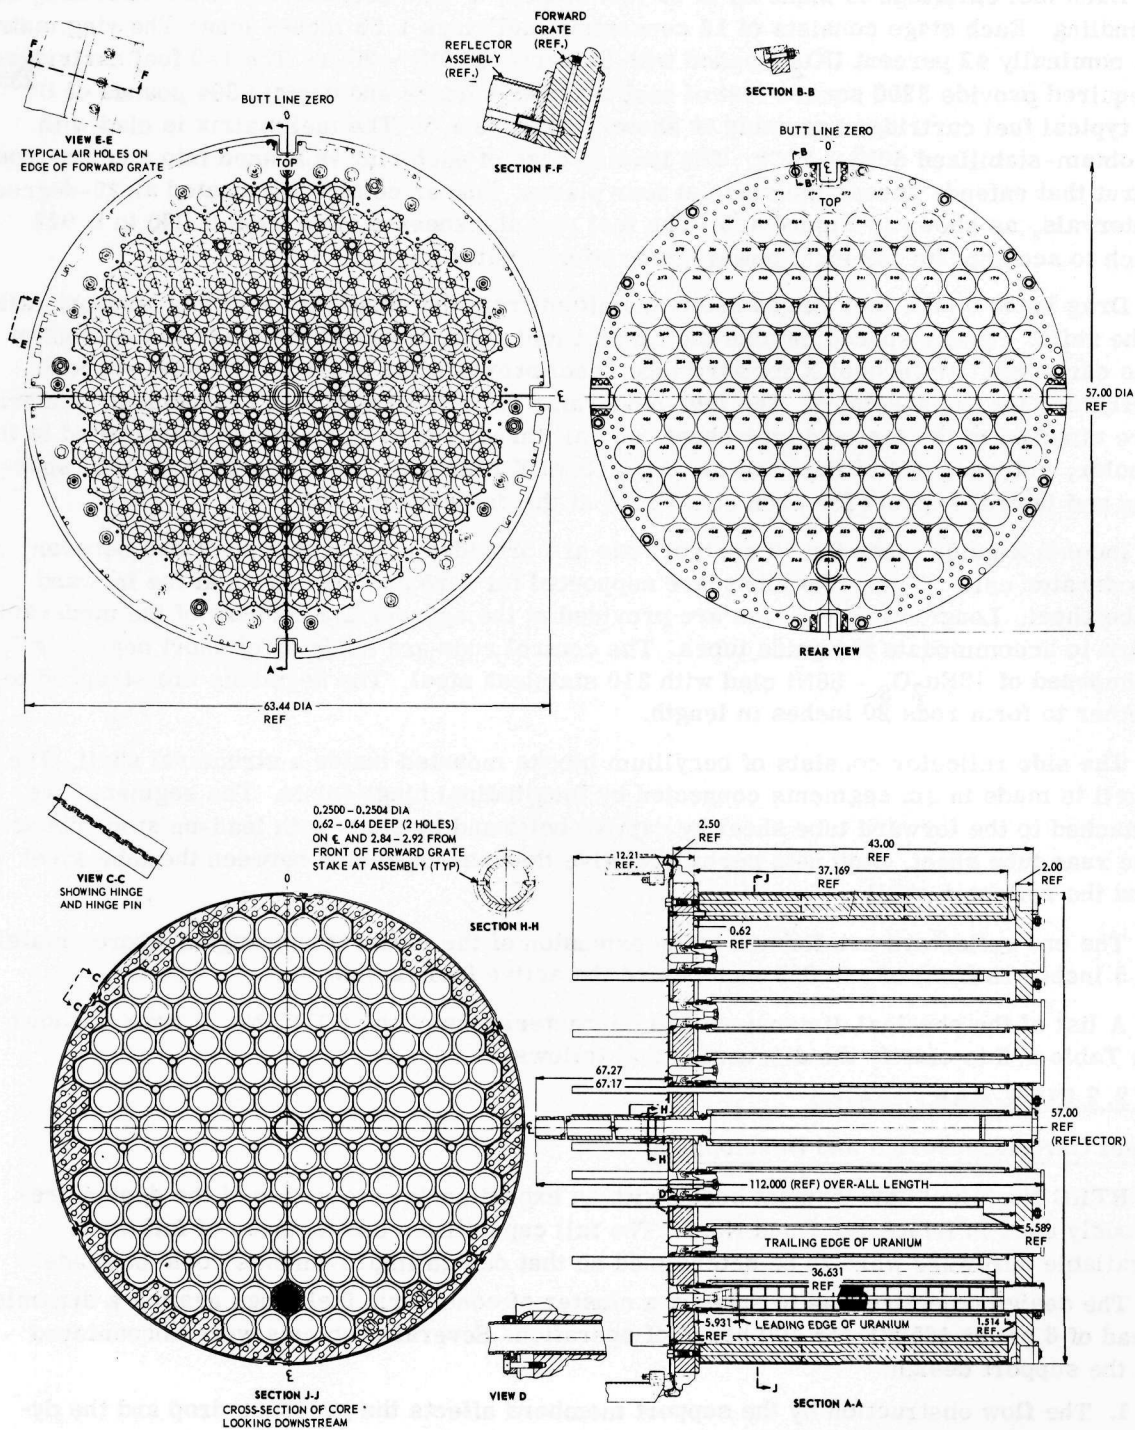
HTRE No. 3 core assembly (Dwg. 7018R51)
